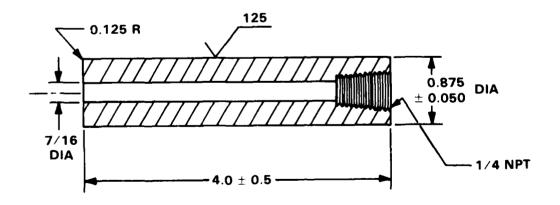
SCHEMATIC OF BRASS ADAPTER FOR CONNECTING THE VALVE MANIFOLD TO THE VACUUM PUMP HOSE.
